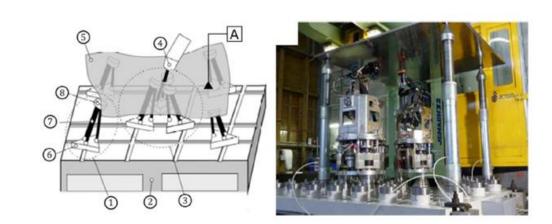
Swarm fixture concept (left) and prototype of the system (right)
